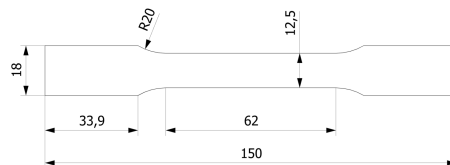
Specimen for tensile test of sheets with longitudinal laser in minimum level HAZ.
